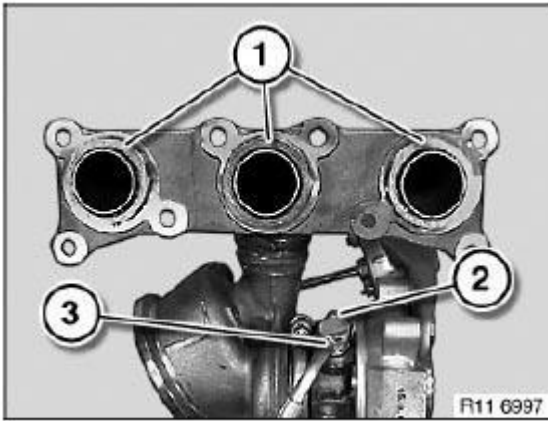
Identifying Oil Feed Line And Graphite Sealing Rings
